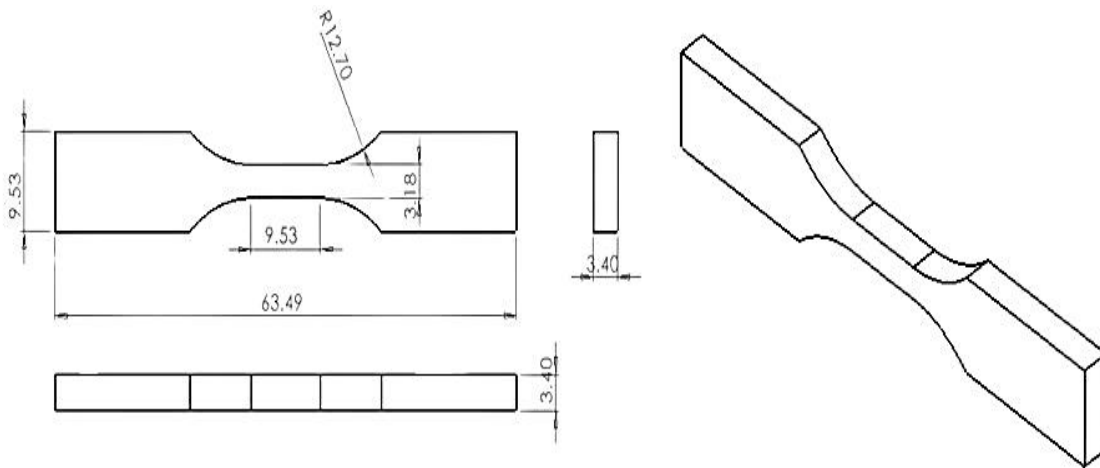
The dimensions of ASTM D638 Type-V (all dimensions are in mm)
